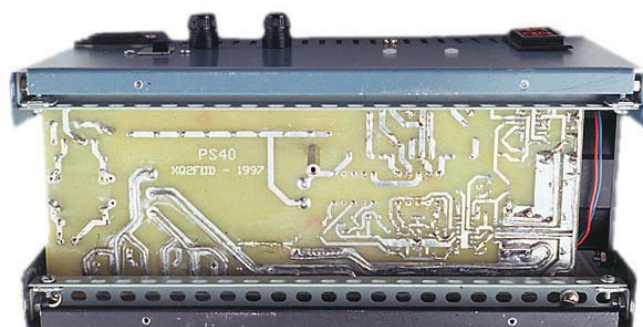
Photo of bottom of PCB mounted in cabinet.
